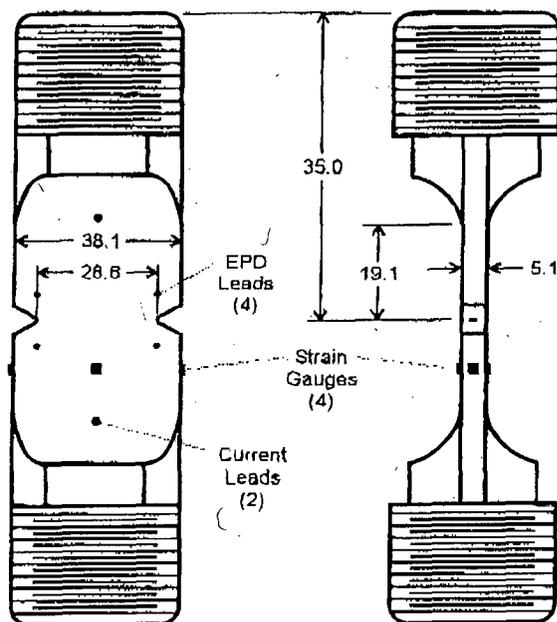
Double-edge notched fatigue specimen with EPD (Grip details not shown, all dimensions in mm)
